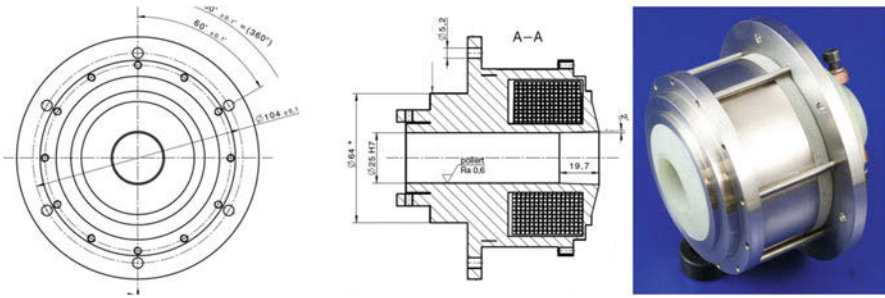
Technical drawing of the coil used in the wind tunnel model and photograph
